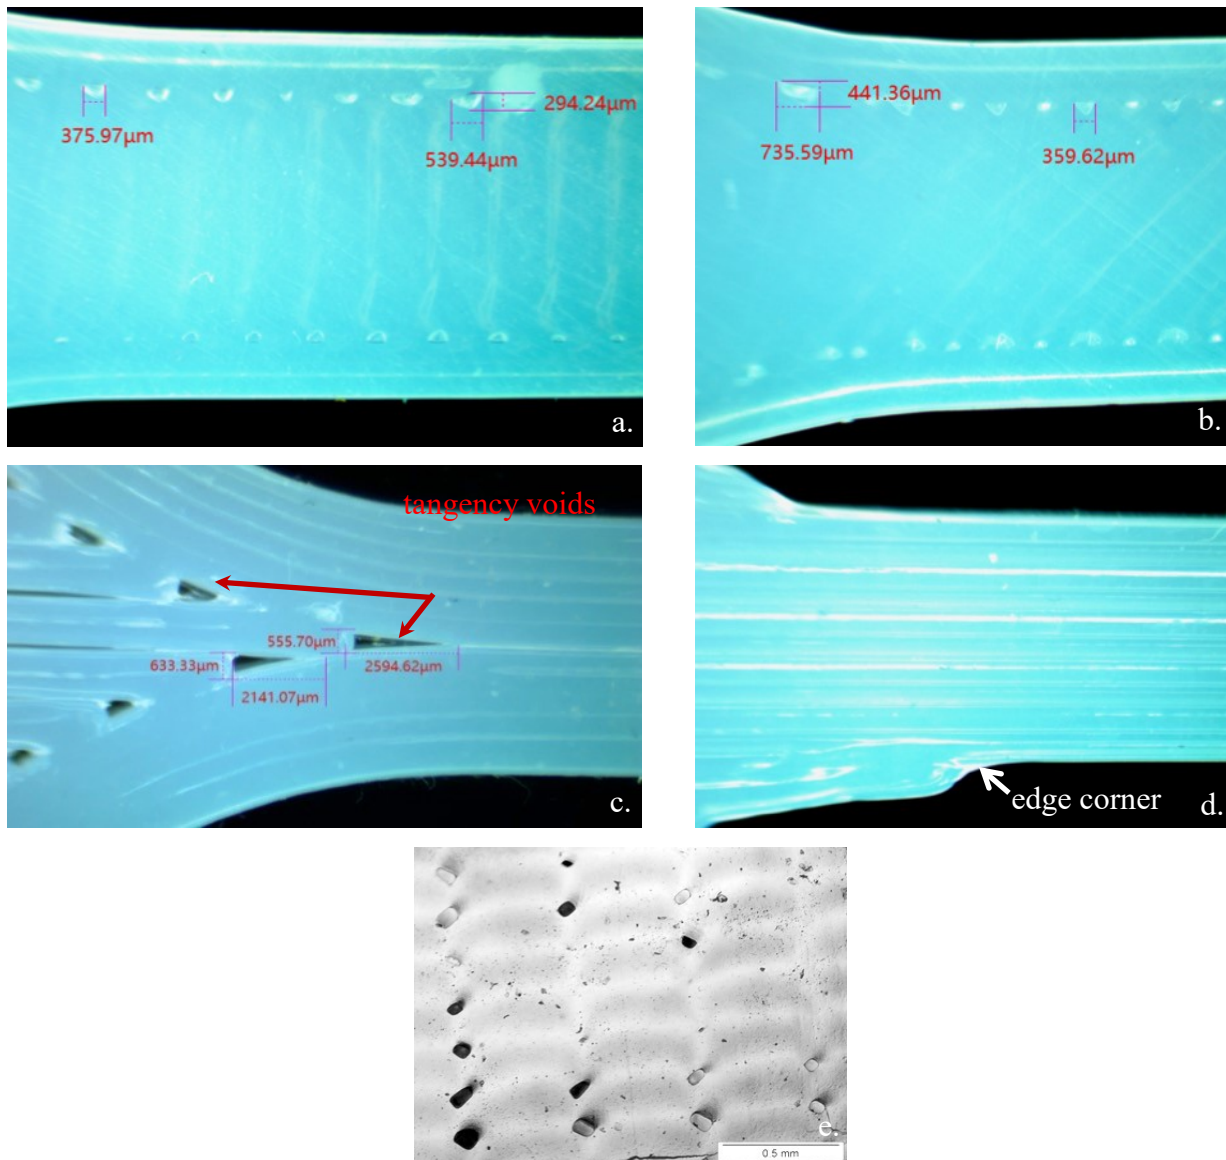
Detailed bottom-view of AM Specimens with $X = 0.97$ (a) 90° , (b) $\pm 45^\circ$, (c) 0° -O, and (d) 0° -NO along with (e) cross sectional view of 0° -NO. The bottom surface is shown to more easily quantify void size.
